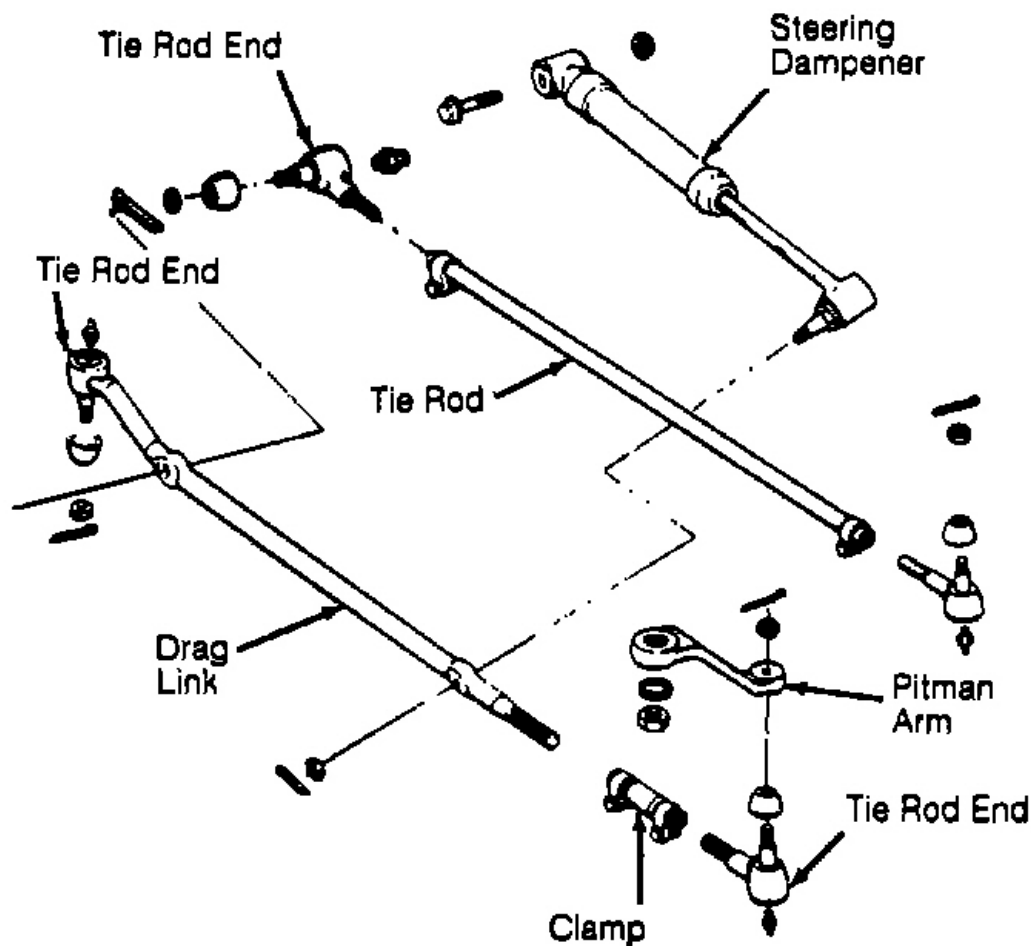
Exploded View Of Steering Linkage (Except Wrangler)
